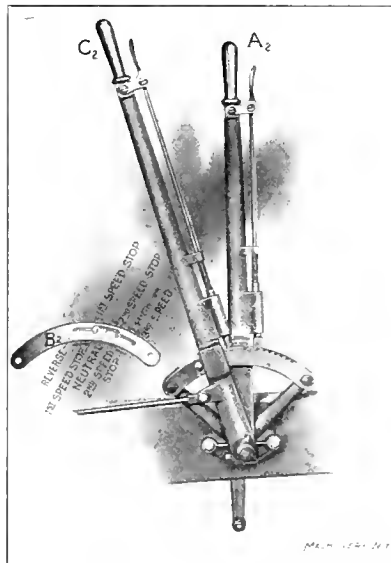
The Speed Gear Control and Emergency Brake Levers
